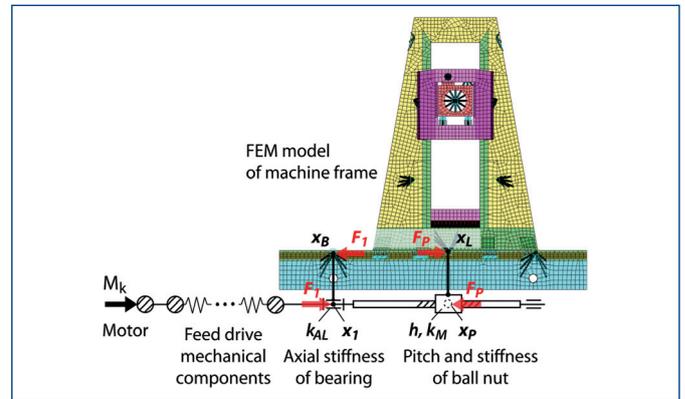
Discrete model of the ball screw feed drive and connection to the machine frame.
